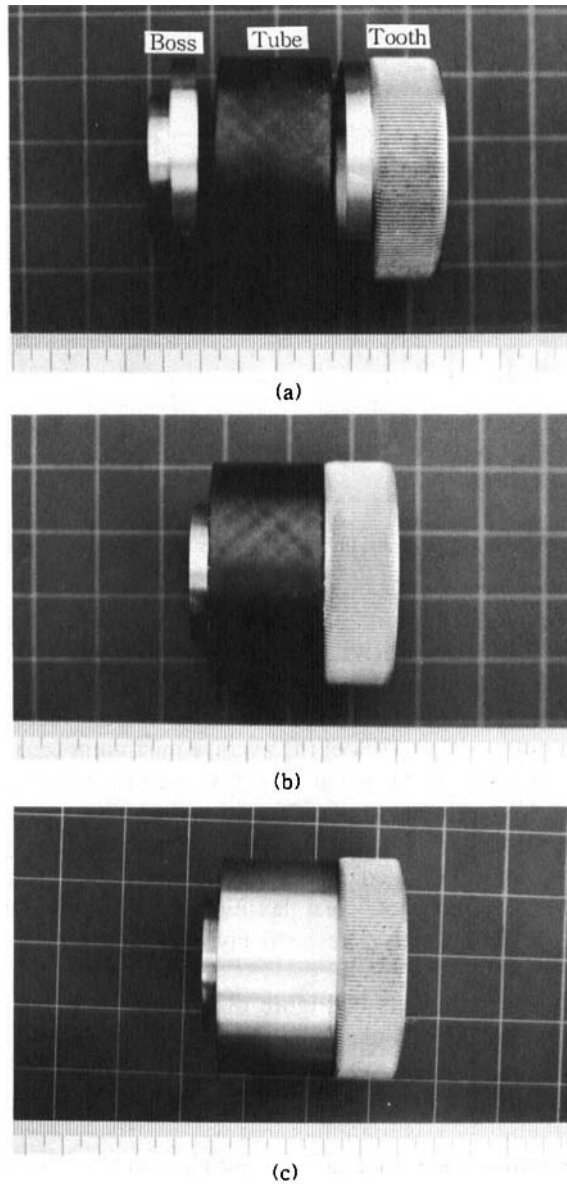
Manufactured flexsplines: a) boss, tube and tooth sections, b) assembled composite flexspline and c) one-piece steel flexspline. See Color Plate I.
